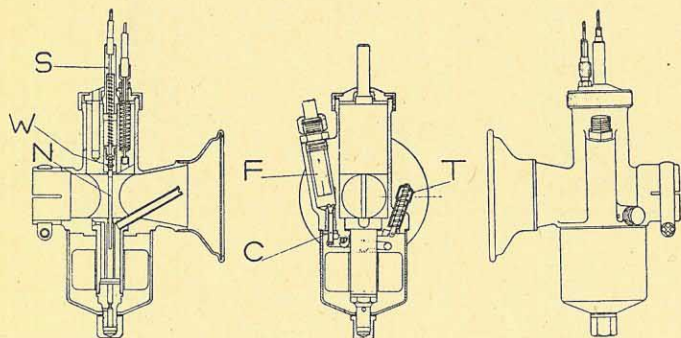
THE HEAVYWEIGHT CARBURETTER.
